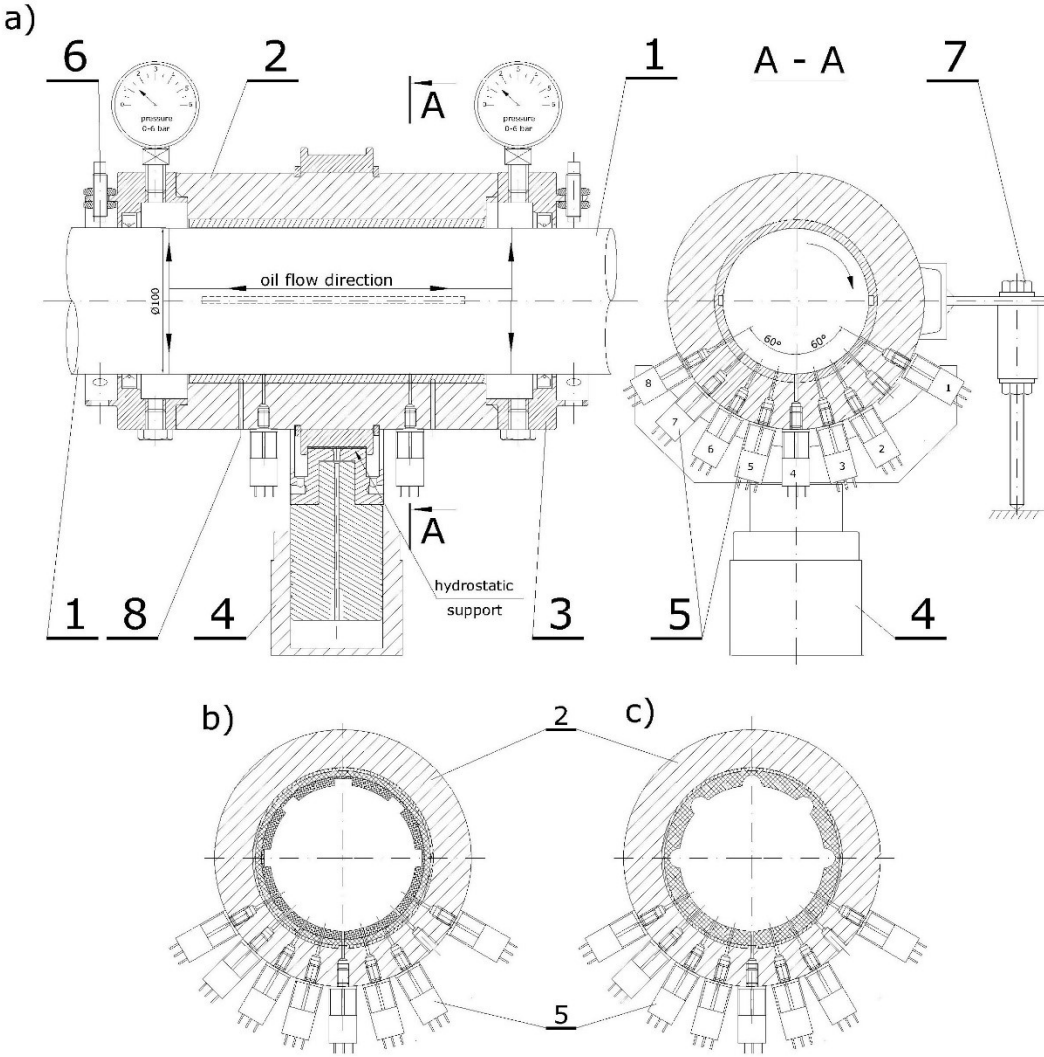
The tested bearing unit, a) cross-section of oil lubricated bearing; 1- main shaft, 2- test bushing assembly, 3- cover with seals, 4 - load exertion system, 5- pressure sensors, 6- distance sensors, 7- friction force sensor, 8 - temperature sensors installed in the bushing sliding layer; b) water lubricated polymer bearing bush unit, c) water lubricated NBR bearing bush
